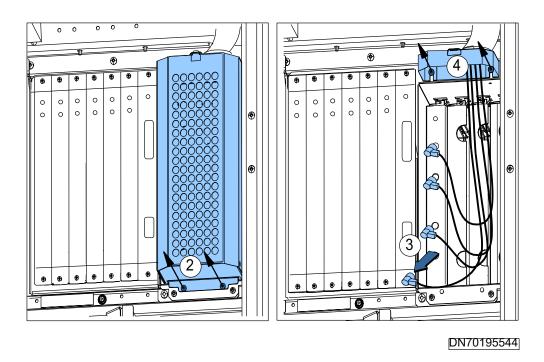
Removing the transmission rack front cover, transmission unit cables and transmission rack front cover support part
